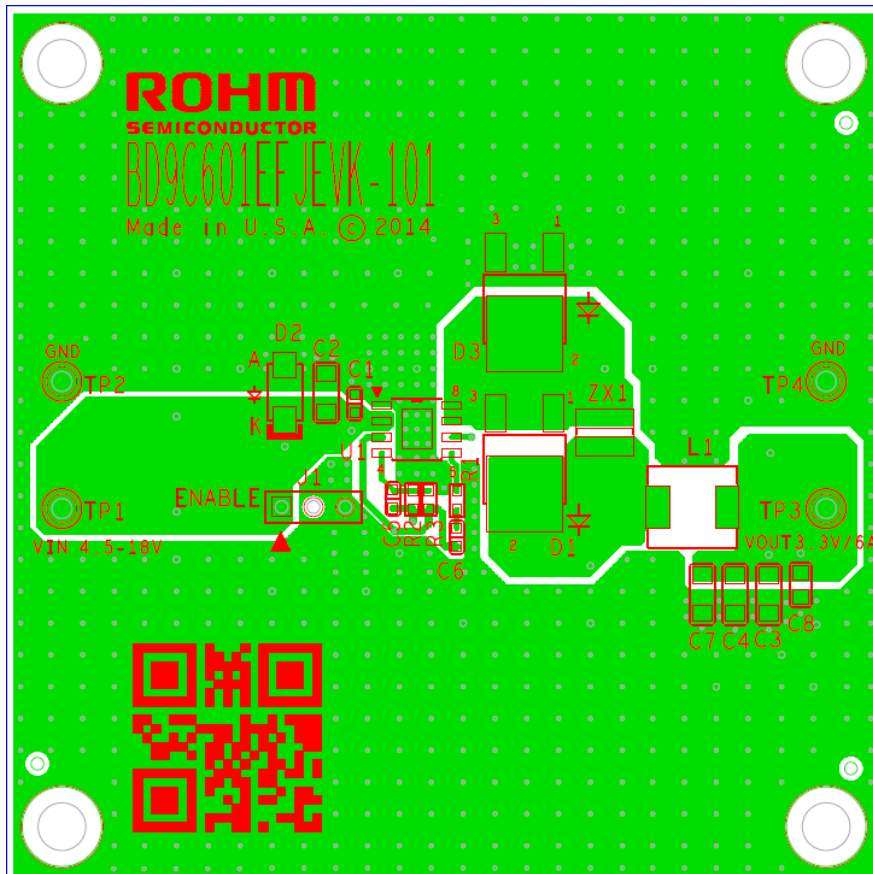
BD9C601EFJ Evaluation Board PCB Layout
